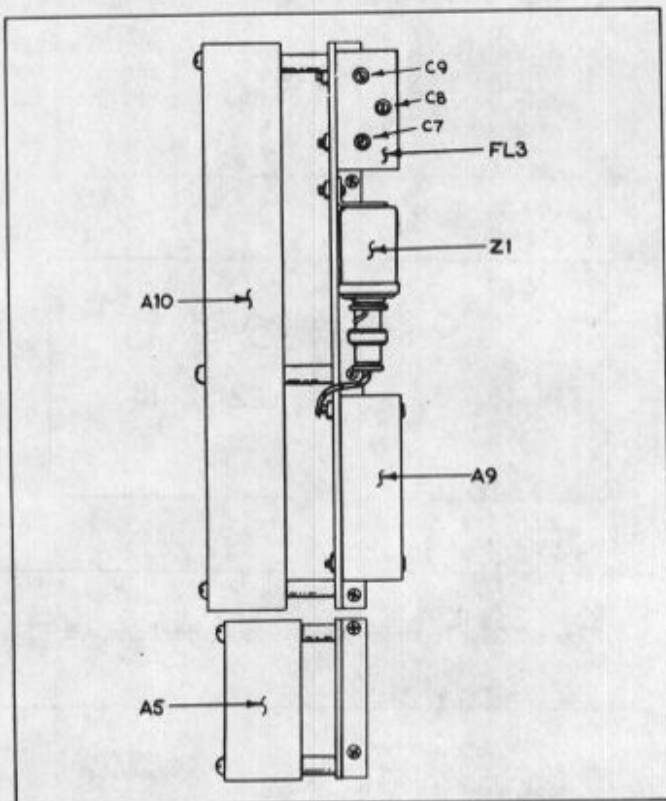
Trimmer Locations, Assembly A5, A9 and A10
